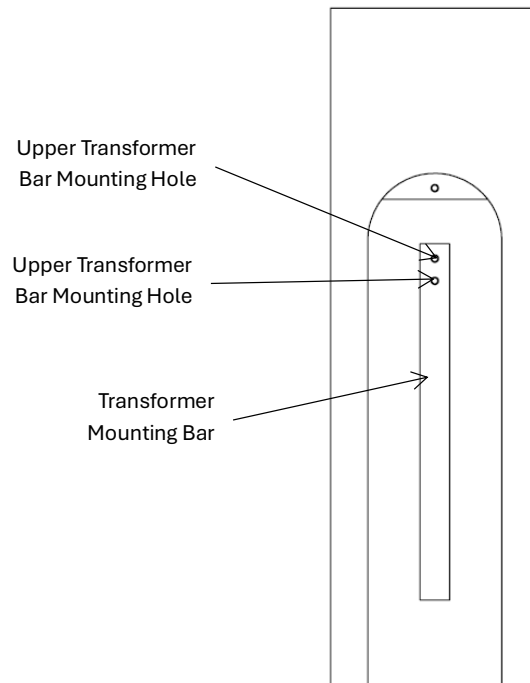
Transformer Bar for Mounting Control Unit
